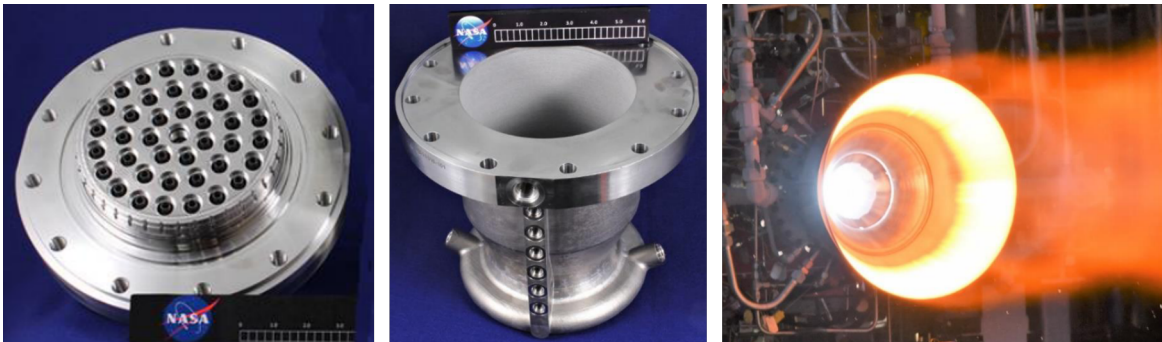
Examples of AM combustion devices developed at MSFC. From left to right: 4000-lbf swirl coaxial injector made from inconel 625, LOx/Methane engine throat made from inconel, and hot-fire test of bi-metallic nozzle extension. Borrowed from [15].
